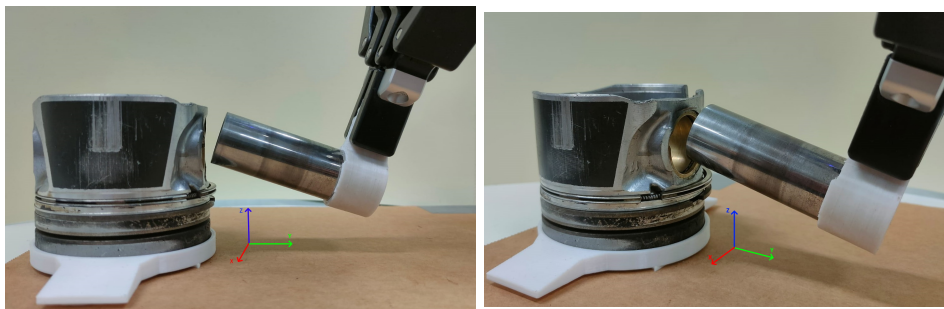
Assembly operation, view 1. Figure 52: Assembly operation, view 2.
